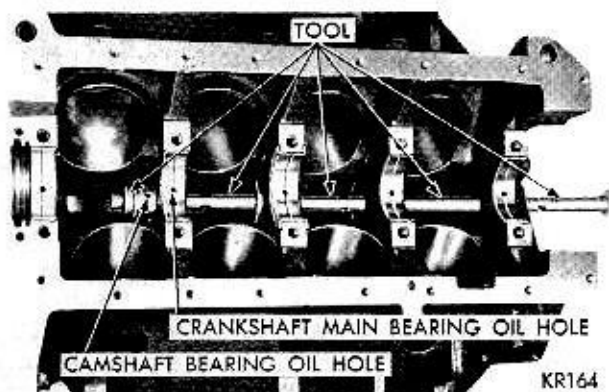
Removing Camshaft Bearing Using Tool C-3132A
